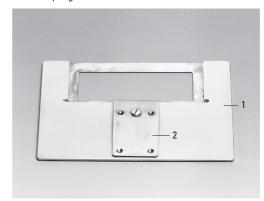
a, b Mounting screws for 3-plate cross-stage
